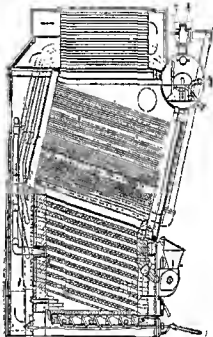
Sectional-header boiler equipped with spreader stoker.
